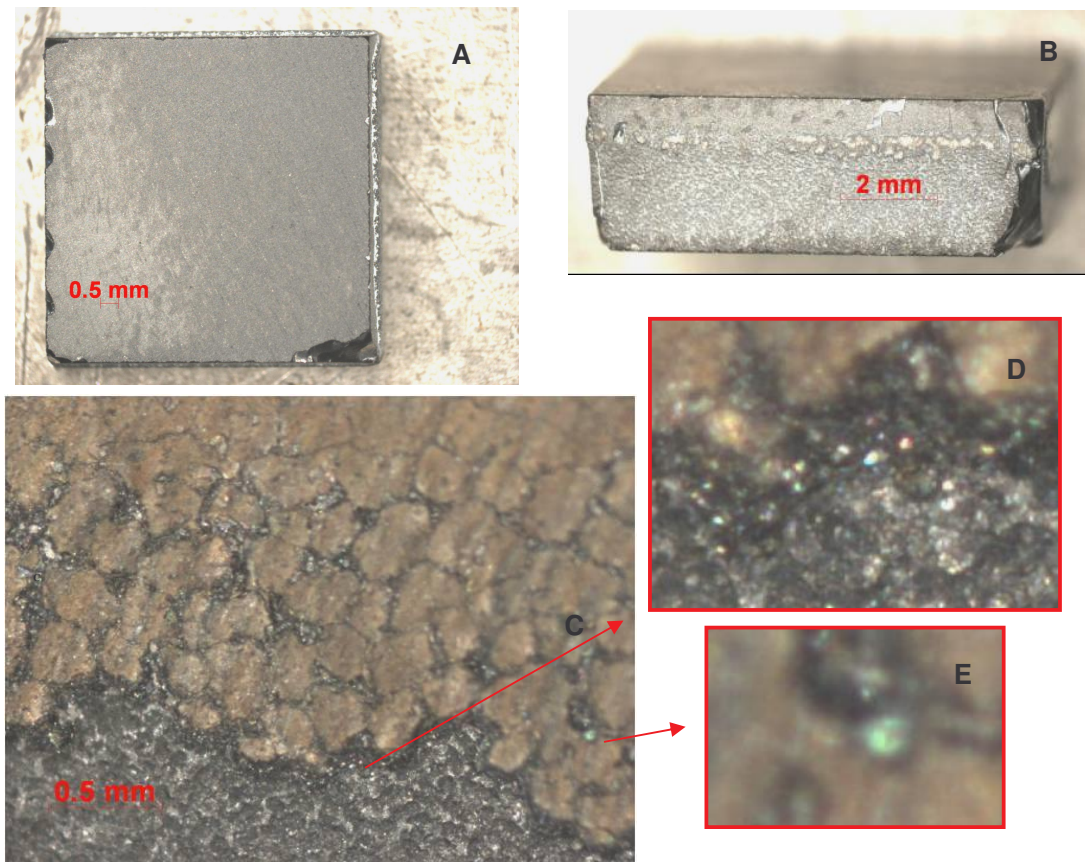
A: Laser cut blank viewed from above showing edge chipping and brittle fracture, B: the same blank showing the melt layer similar to that observed in the thermal stability tests, C: close up image of the melt layer that strongly resembles thermal stability testing results, D and E: zoomed in images of the regions indicated by the arrows showing crystallite formation, as was observed in thermal stability testing.
